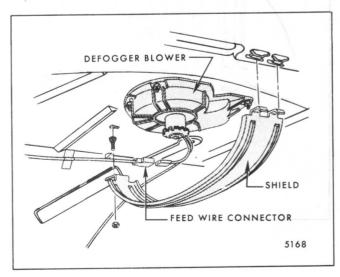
Back Window Defogger Blower Shield - "A" Styles
